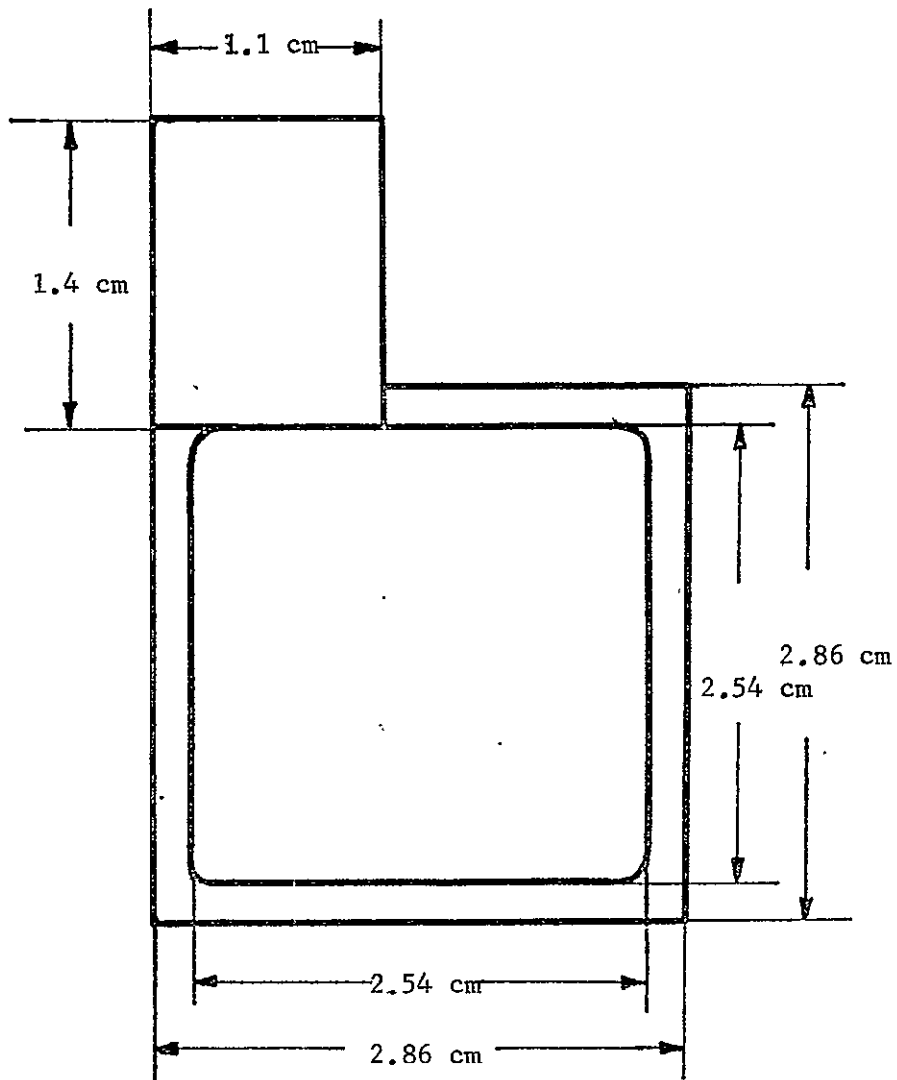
PLAQUE WITH COINED EDGE AND TAB ATTACHED BY SPOT WELDING
